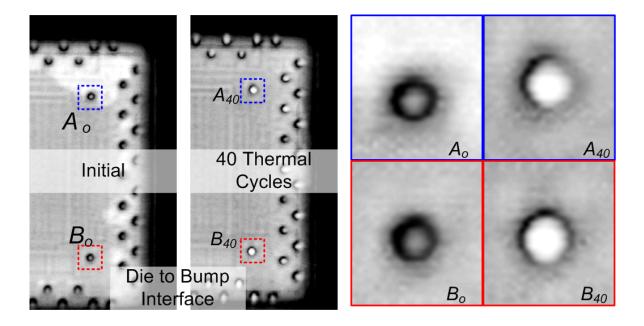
Edge effect in ultrasonic C-scan images of the silicon die-solder bump interface produced from the detection of two flip-chip packages soldered on a PCB board using a 230MHz focusing transducer. A₀ and B₀: before thermal cycling; A₄₀ and B₄₀: after thermal cycling for 40 thermal cycles.
